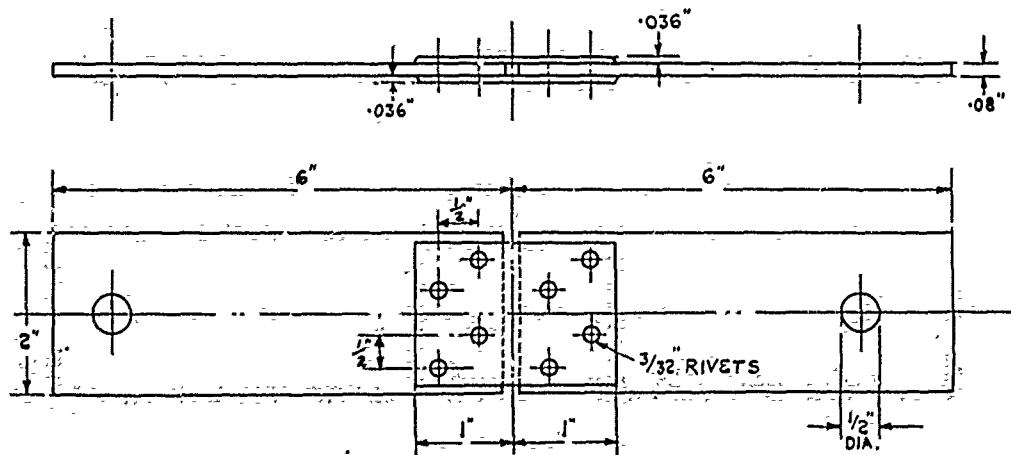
DETAIL OF SPECIMENS FOR TESTING STIFFNESS ETC. OF BUTT JOINTS.
